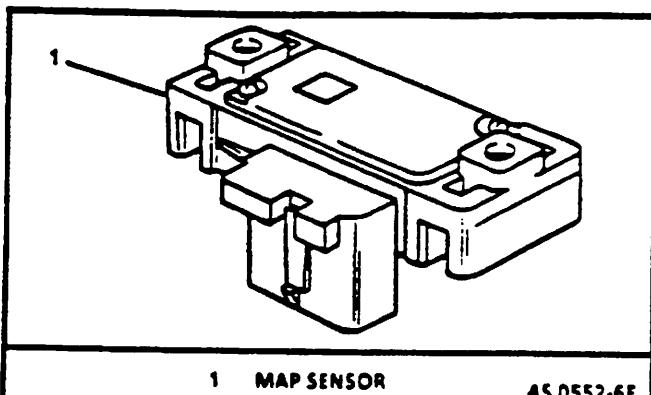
Manifold Absolute Pressure (MAP) Sensor
